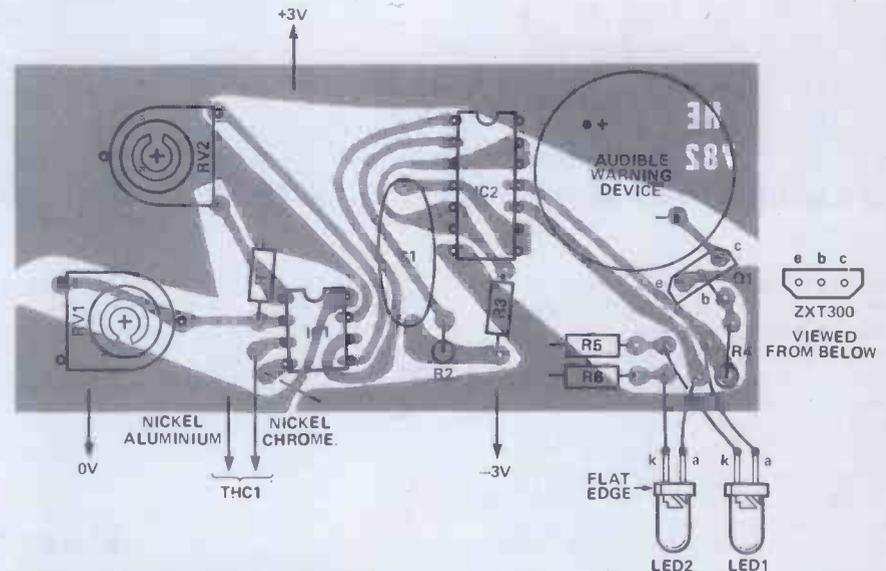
PCB assembly diagram. Remember not to handle the CMOS ICs!
